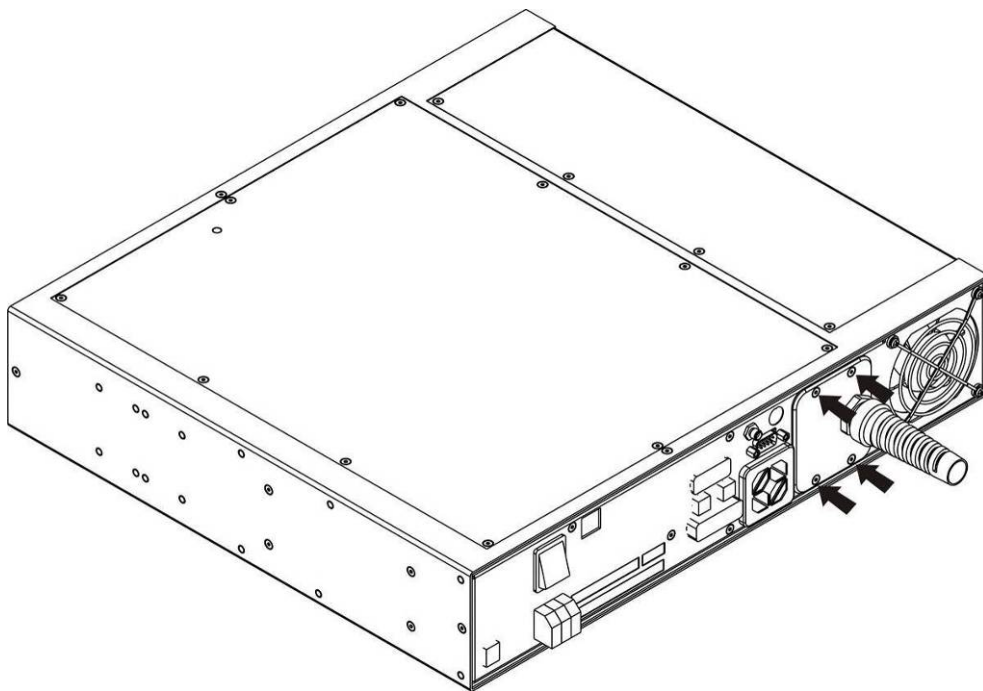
Disassembling the plate and optical fiber cable gland from the rack.
